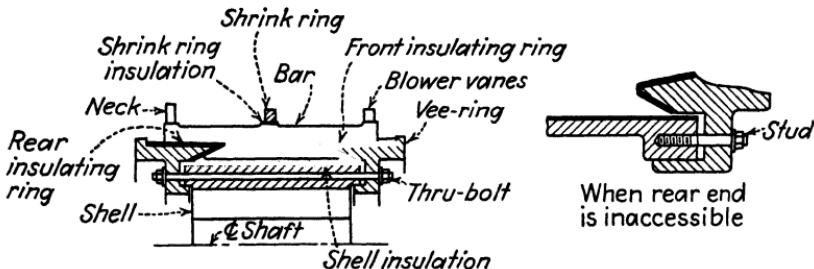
Commutator section with bolt fastening. (Courtesy of Westinghouse Electric & Manufacturing Co.)
